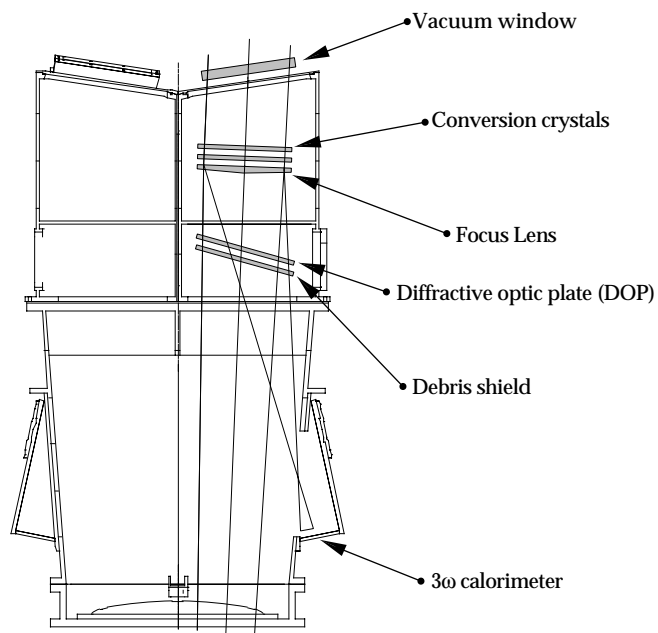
The optical design requires the final optics assembly to support a number of key optical components. (40-00-1097-2268pb01)
